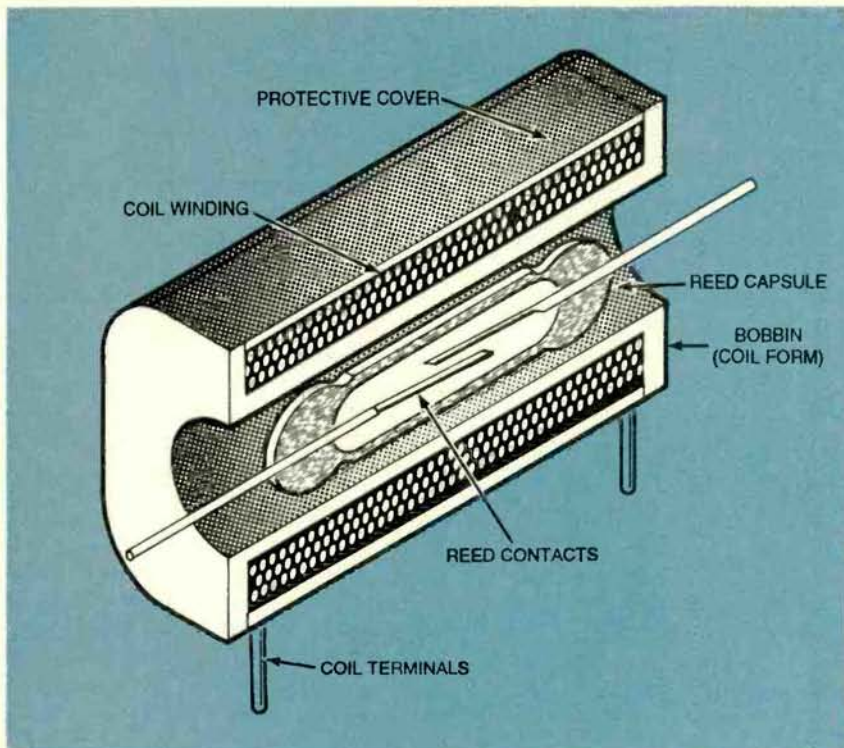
CUTAWAY VIEW OF A REED RELAY showing section views of the energizing coil and reed-switch capsule.
